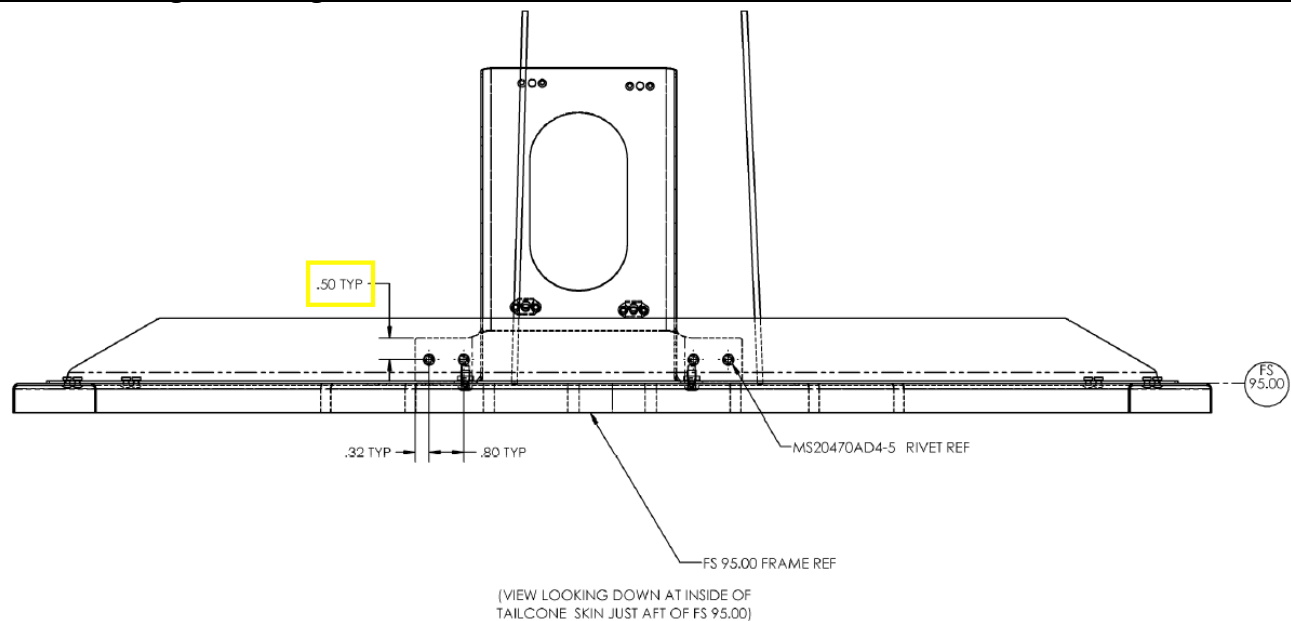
PITCH INSTALLATION TOP VIEW
